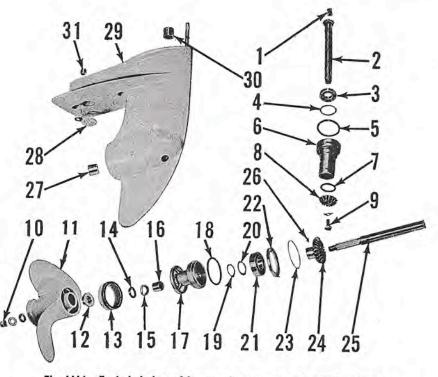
Exploded view of lower unit gearcase and associated parts.
